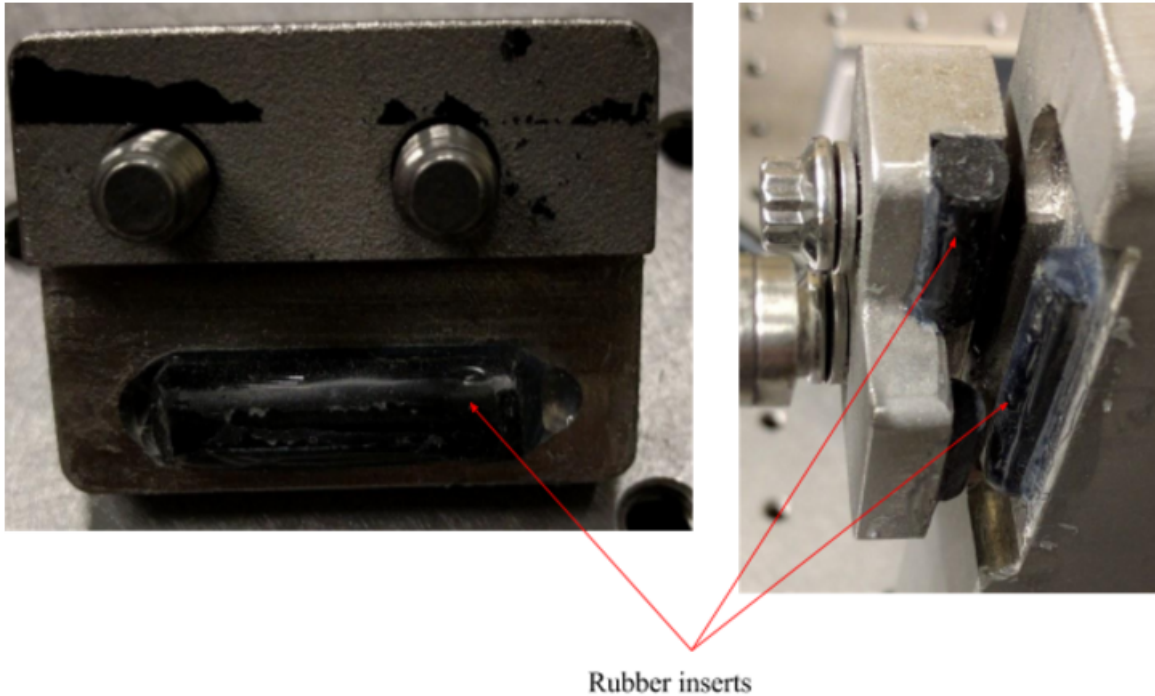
Close-up of part clamps with cylindrical rubber inserts
